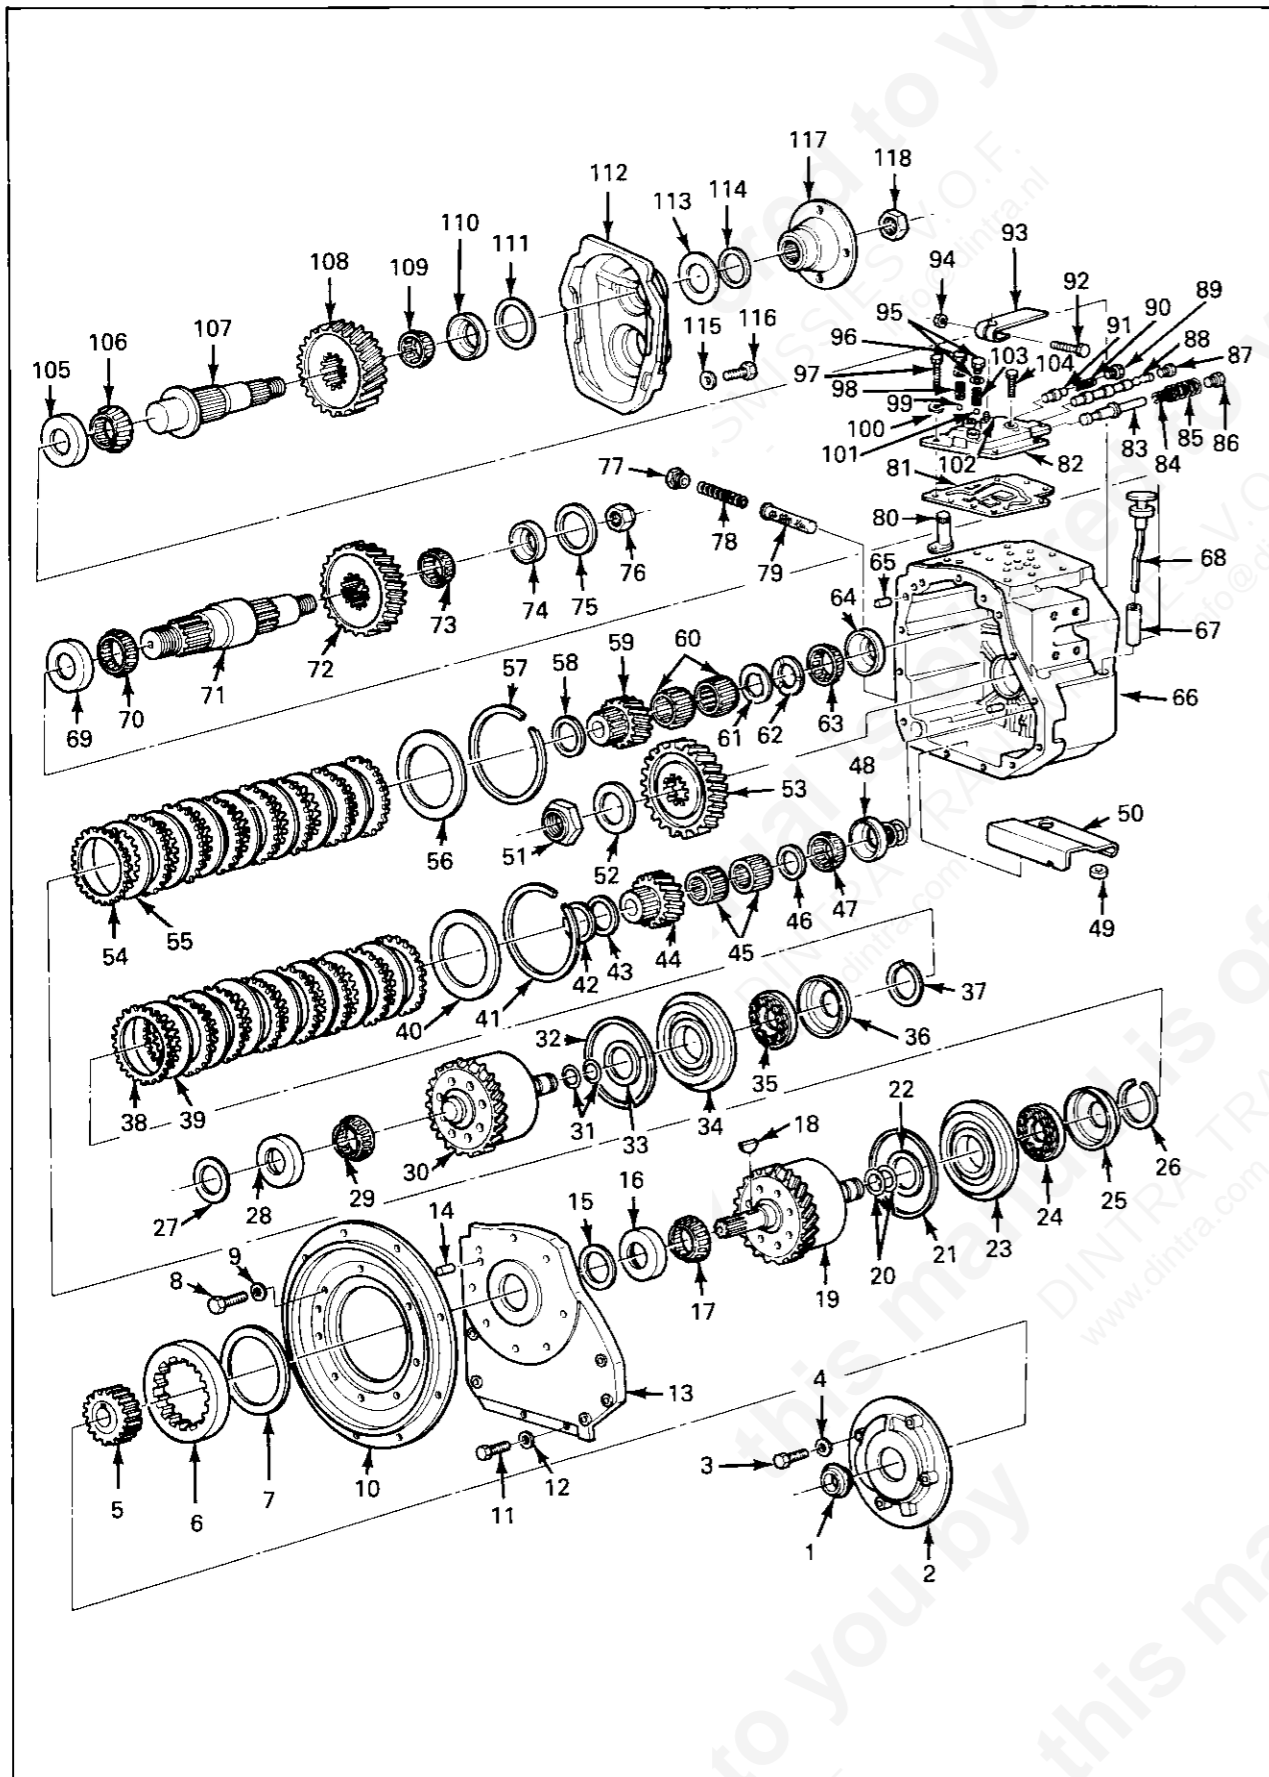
SERIES 7000 TRANSMISSION — EXPLODED VIEW
